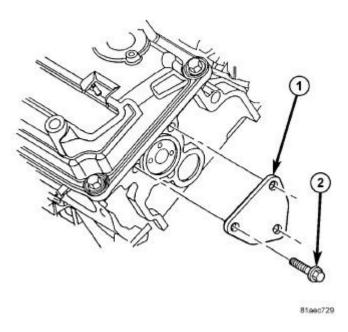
CAM THRUST PLATE W/O O-RING Courtesy of CHRYSLER LLC
